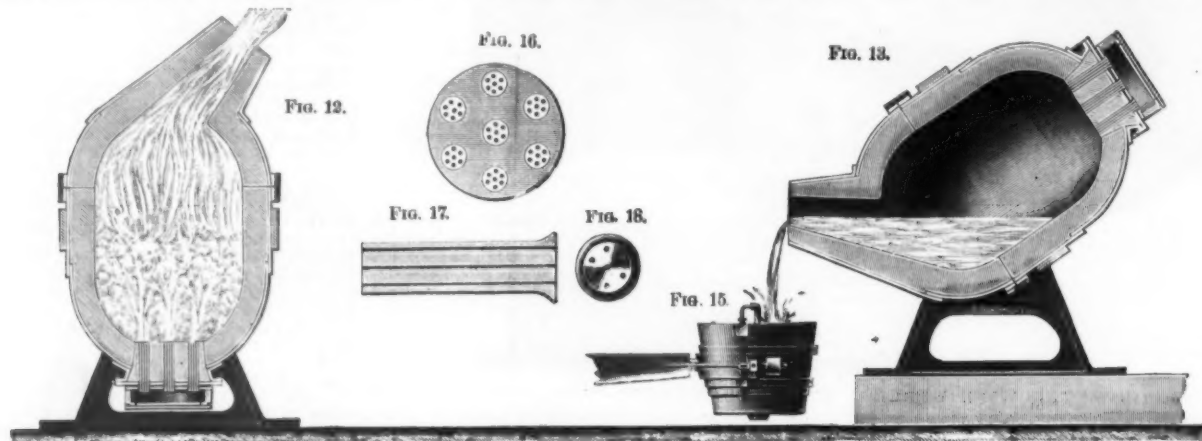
CONVERTER AND HYDRAULIC CASTING APPARATUS, 1856.
